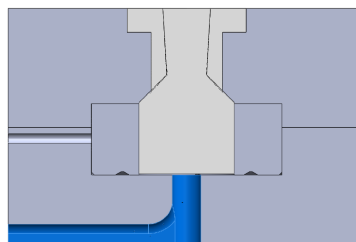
c: Cross-section view of the mould, showing modified mould base with thermocouple port highlighted in blue.
